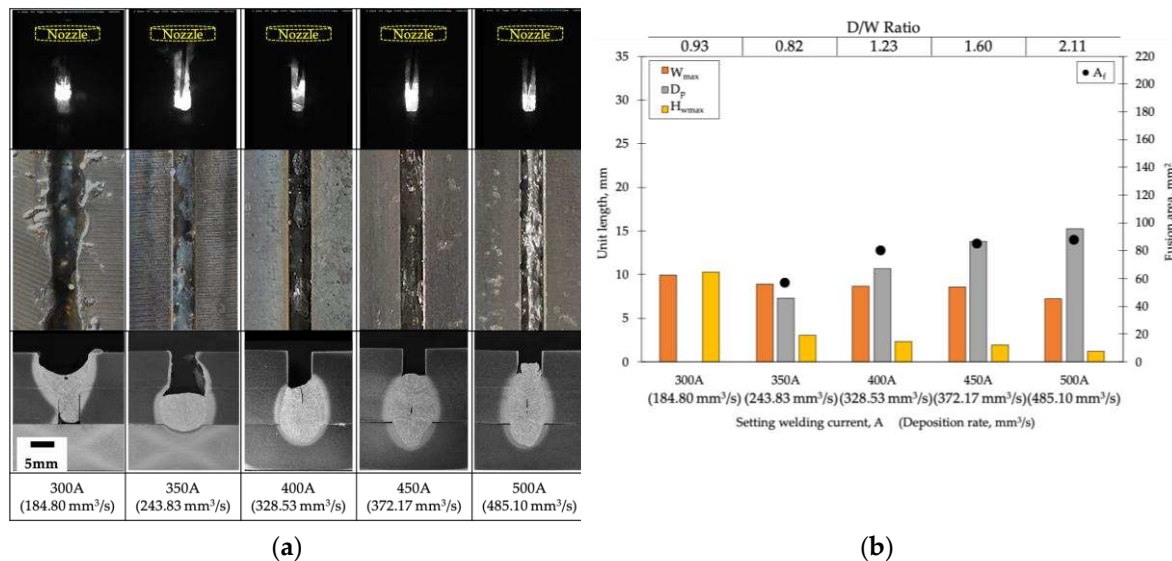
Effects of the welding current for a 5-mm gap and a travel speed of 60-cm/min: (a) arc behavior, weld bead appearance, and cross-sectional analysis and (b) weld profile measurement.
